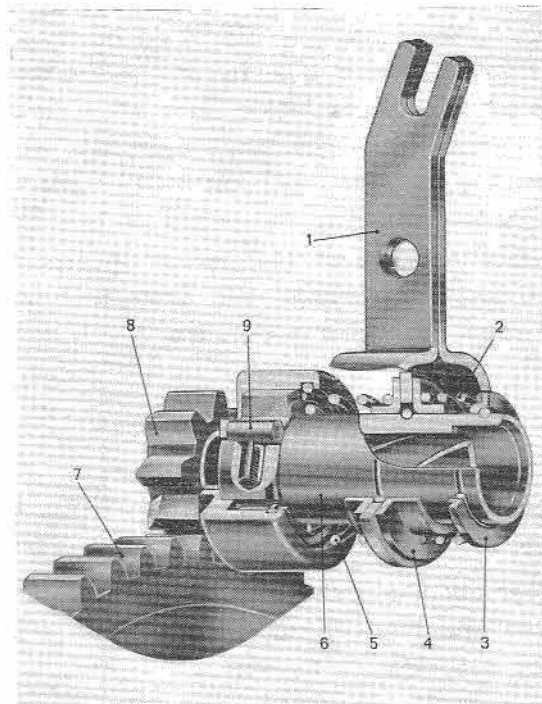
Cutaway view of the thrust-screw combined coupling device.
